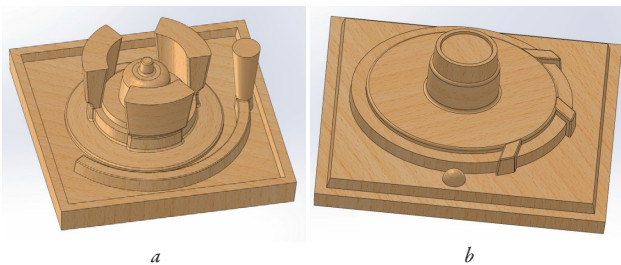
Design of the model impeller tooling: *a* – upper half; *b* – lower half
